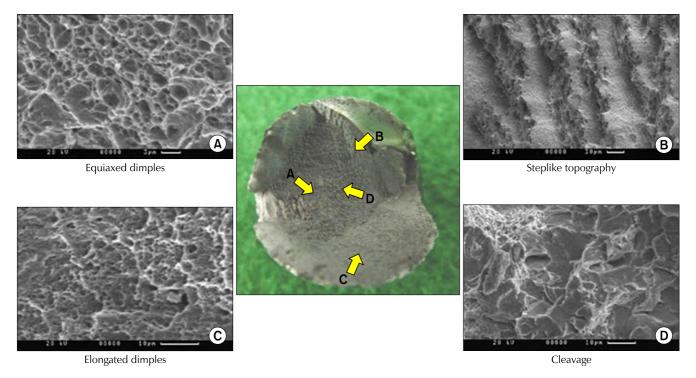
Higher-magnification view of fracture surfaces (Fig. 3 R/H) reveal dimple rupture.
